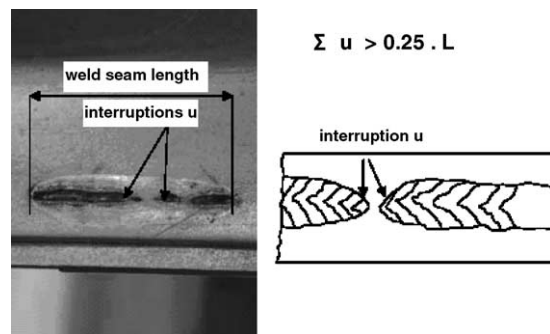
Interruptions failures at the laser weld bead.
